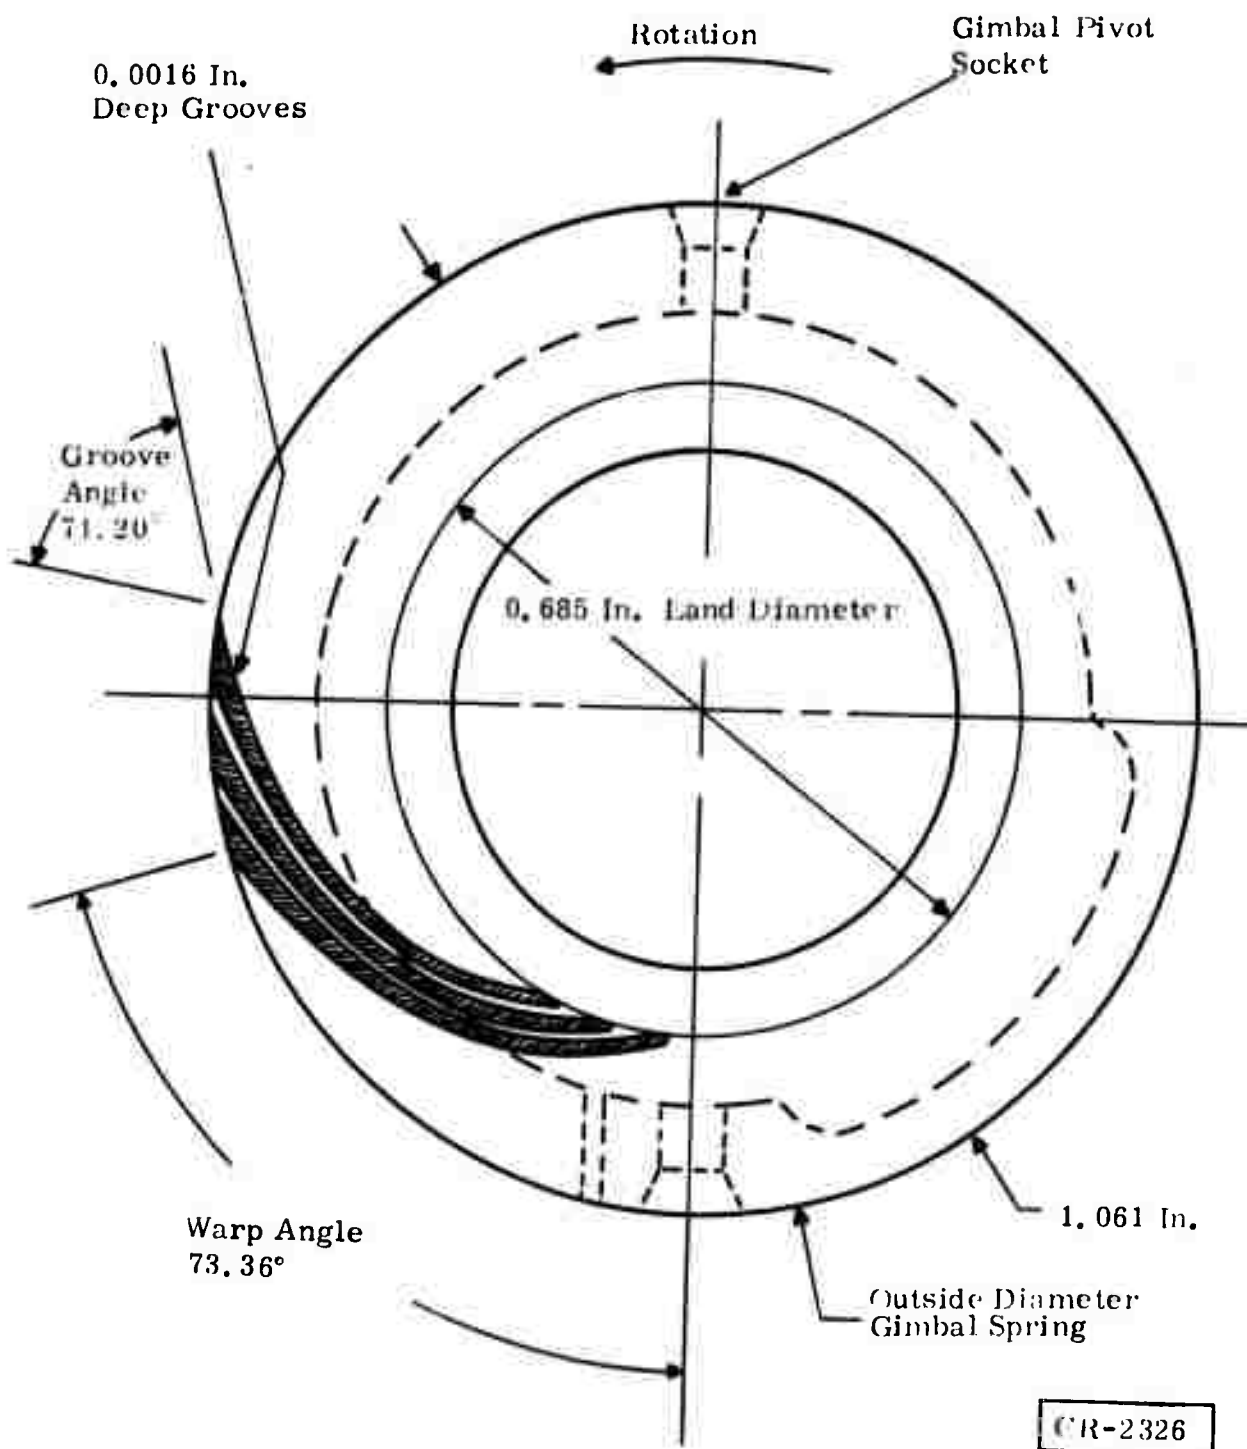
Inward-Pumping Spiral-Groove Thrust Bearing for Big Bertha
